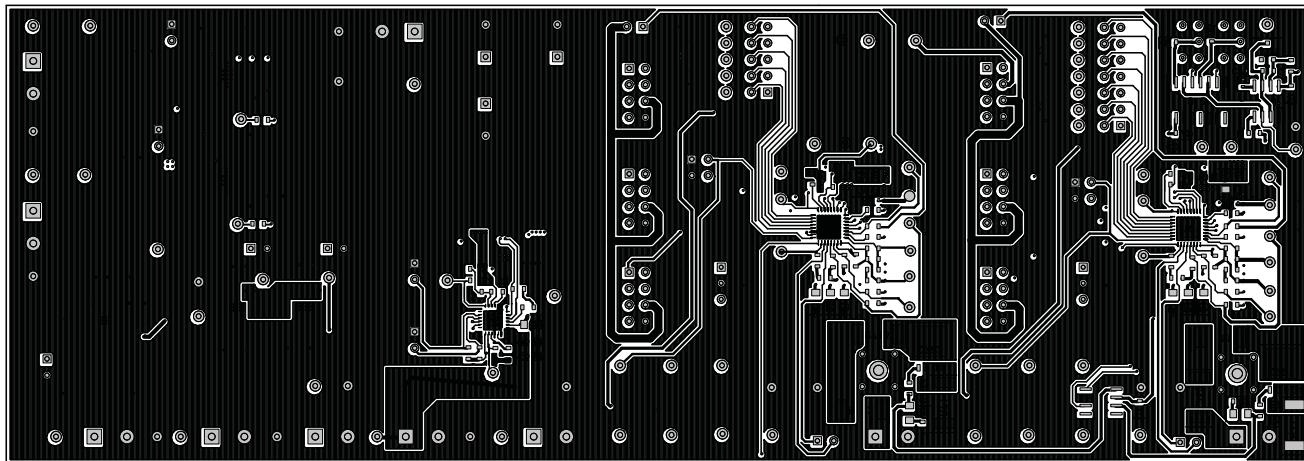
TPS59610EVM-675 Bottom Layer, Bottom View
